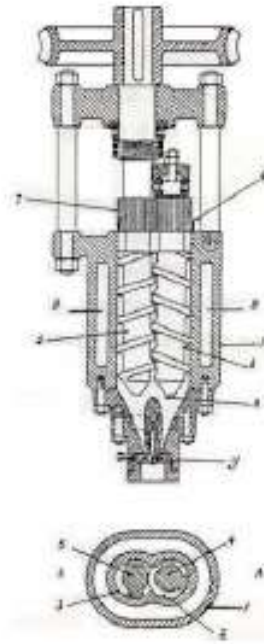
Olier intermeshing twin-screw machine [Olier 1923]
